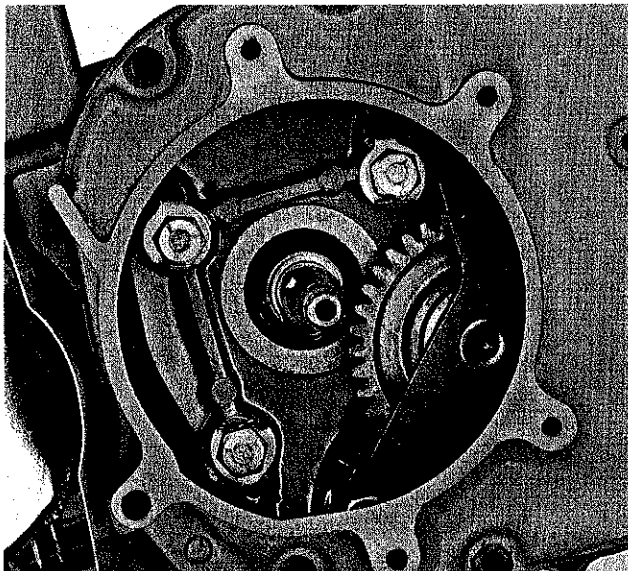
Note that the crankshaft oil seal on geared transmission engines is installed with the lips of the seal toward the gearcase. This is the reverse position of the oil seal when installed on direct drive engines.
